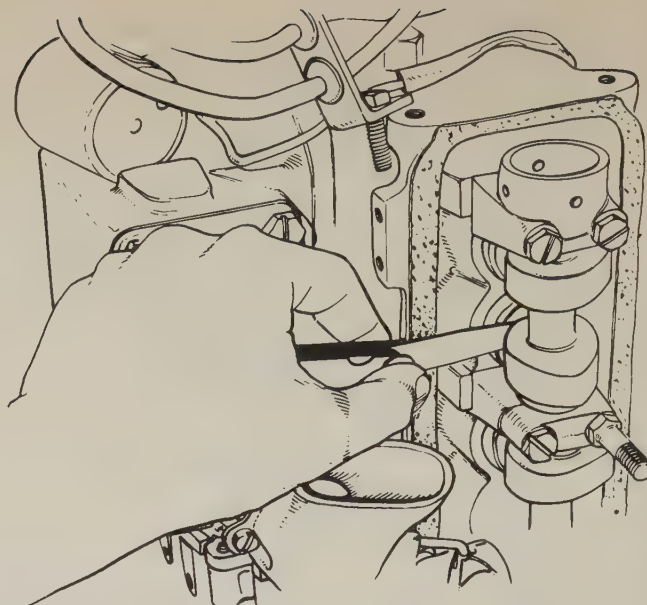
Checking valve clearance on the overhead camshaft engine shown in Fig. 32-8.
